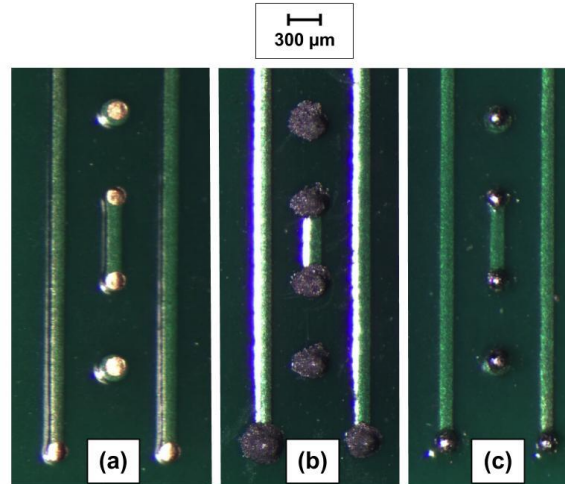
Bumping process of solder joints, showing daughterboard (a) before stencil printing (b) after printing and (c) after reflow.
